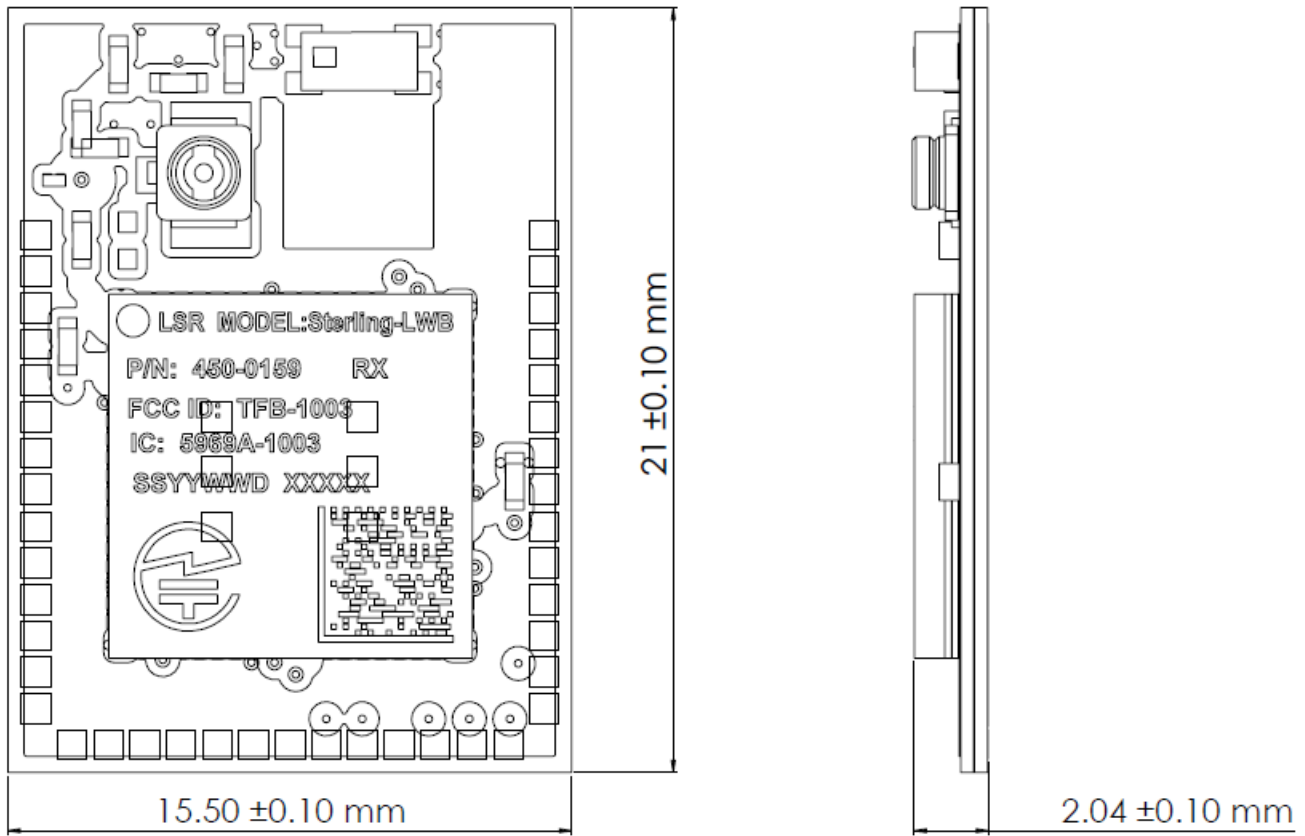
U.FL and Chip Antenna Mechanical Dimensions
